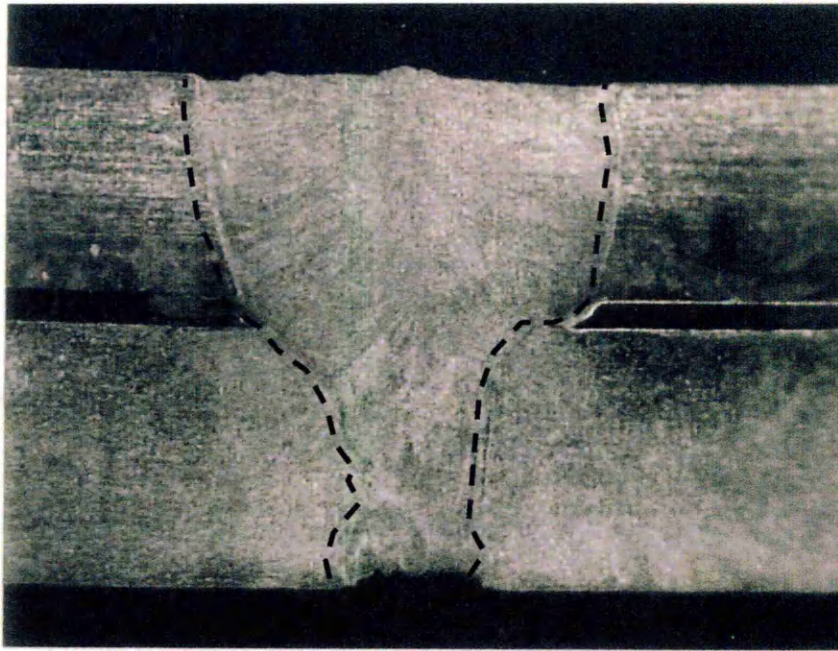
Weld bead shape obtained when the 1mm 304 stainless steel is at the top of the lap joint
